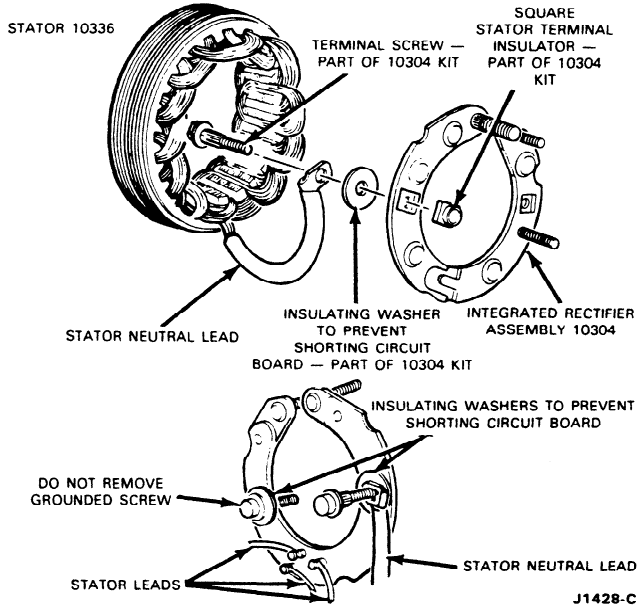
Stator Terminal Installation — Integral Rectifier Circuit Board
